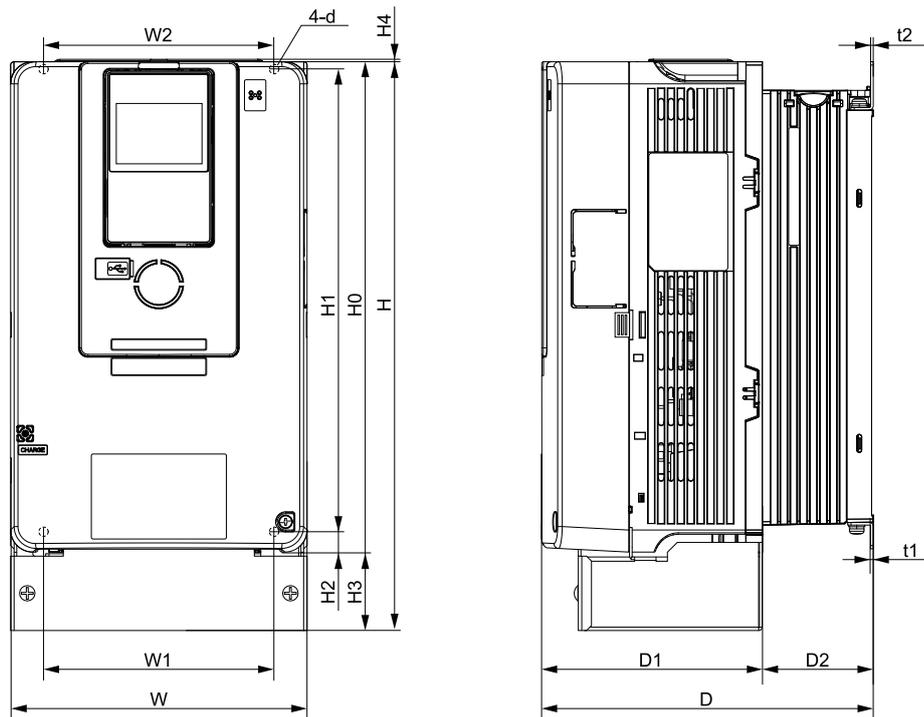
Exterior and Mounting Dimensions Diagram 2
